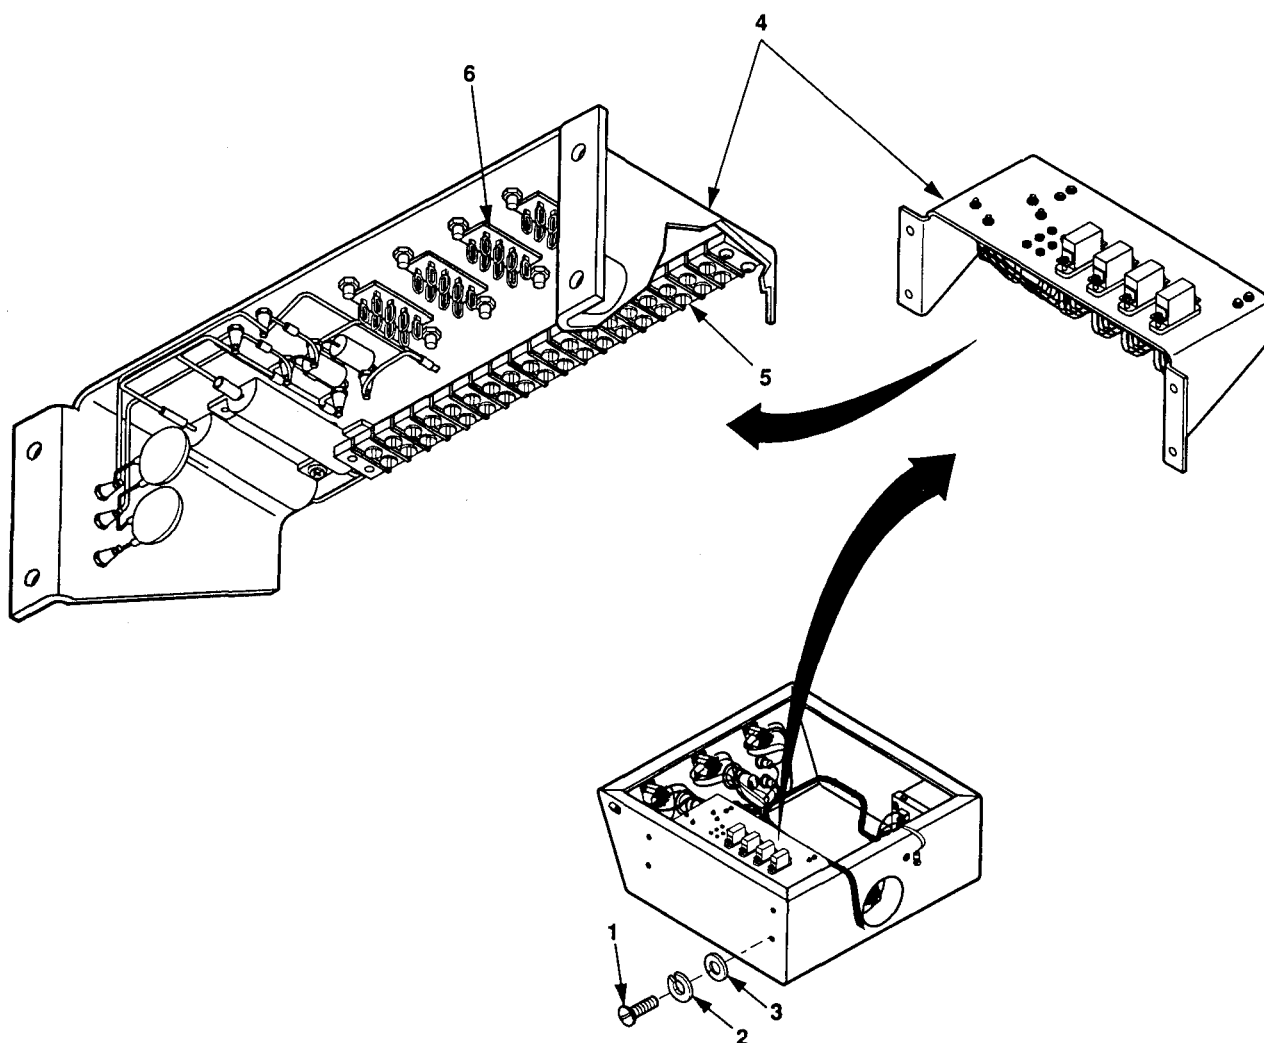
Relay Board Harness Assembly W11 Removal.
